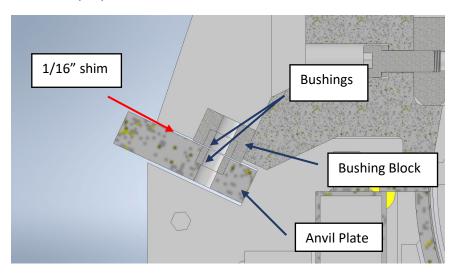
Cross Sectional View of Anvil Plate and Bushing Block (Machine Bolt Removed)
